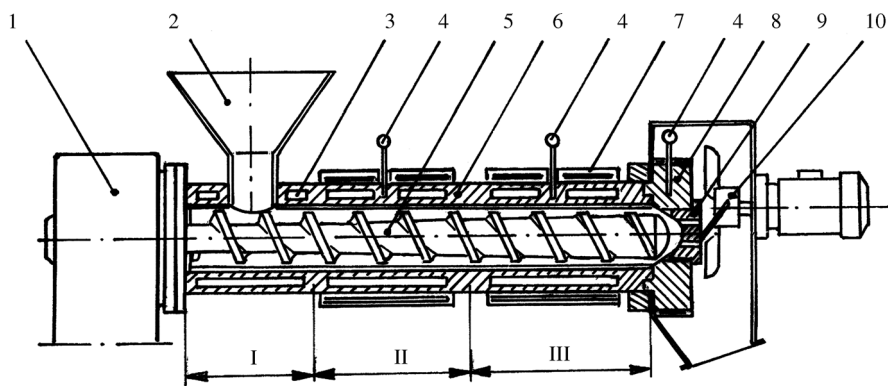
A cross-section of a single-screw food extruder: 1 – engine, 2 – feeder, 3 – cooling jacket, 4 – thermocouple, 5 – screw, 6 – barrel, 7 – heating jacket, 8 – head, 9 – dies, 10 – cutter, I – transport section, II – compression section, III – melting and plasticizing section [1].
